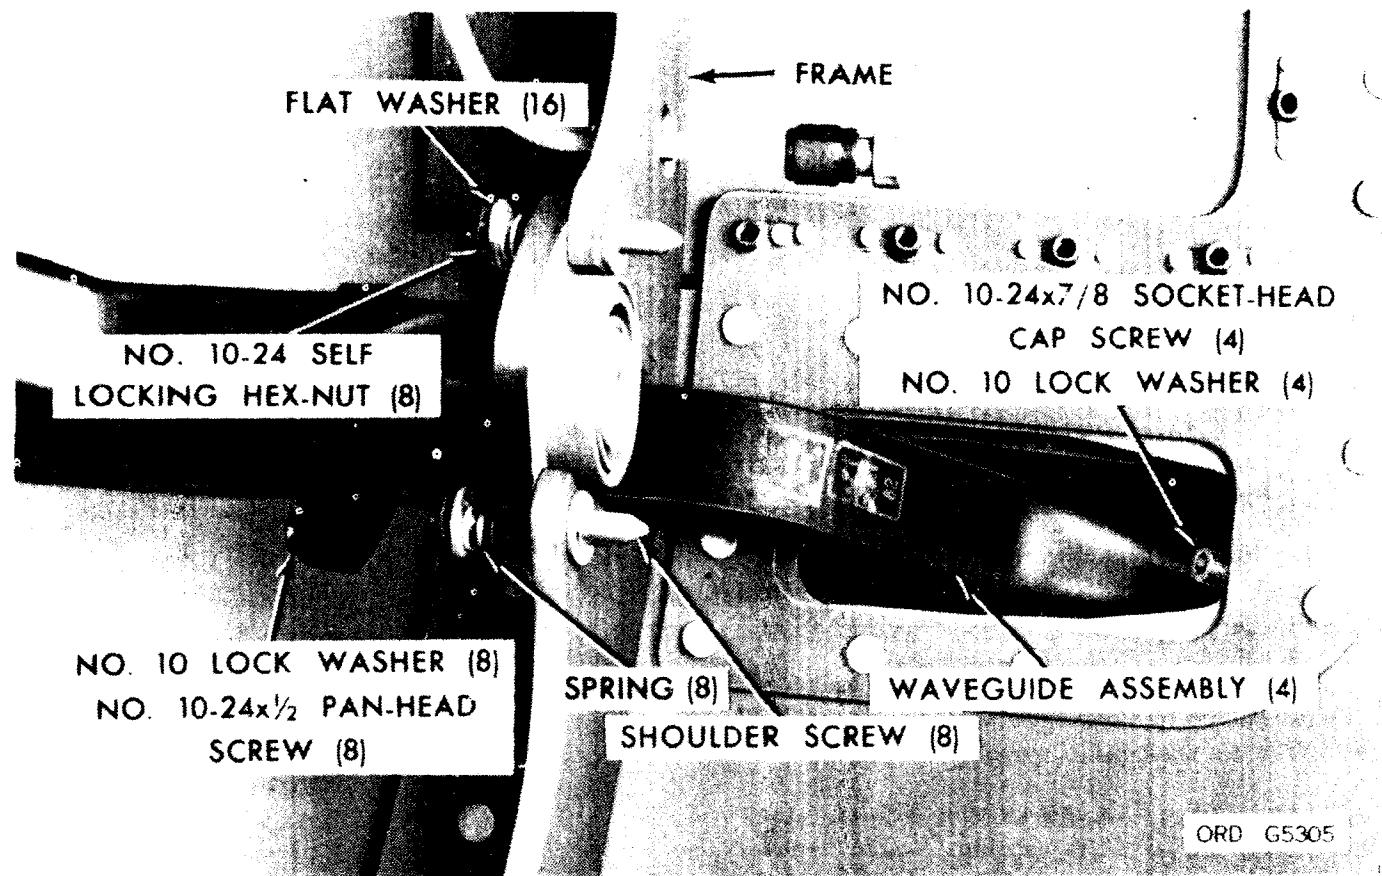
Partial interior view of the forward body section showing a typical waveguide assembly connection.
